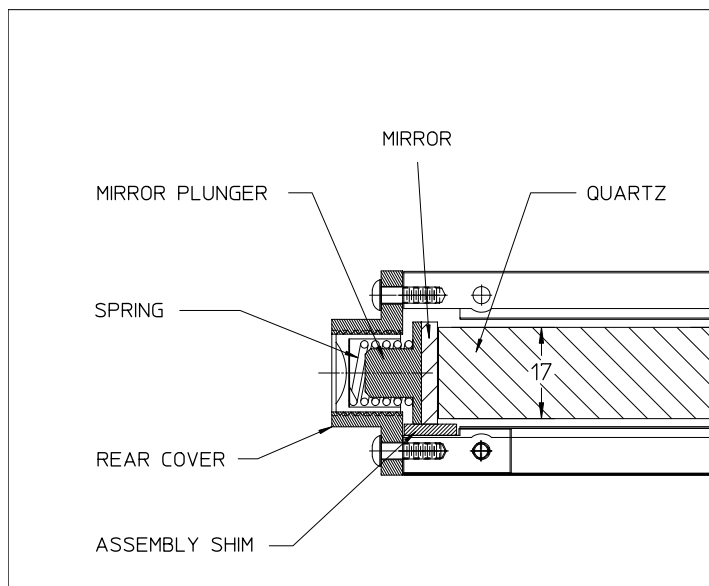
Cross-section through the mirror end of a barbox, showing the end of the radiator bar, front surface, aluminum on quartz mirror, and spring plunger
